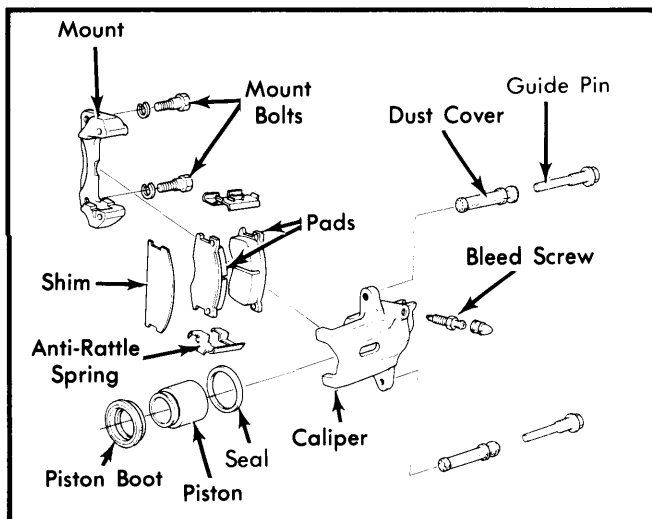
Exploded View of Front Disc Brake Caliper (Civic Hatchback and Prelude)
